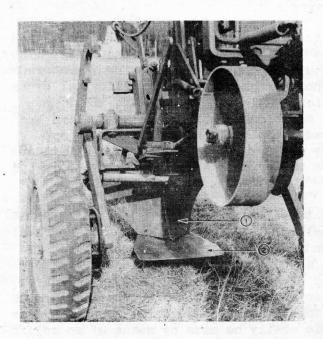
FIG.I - MOLD BOARD AND PLATE ATTACHED TO PLOW LC-61
